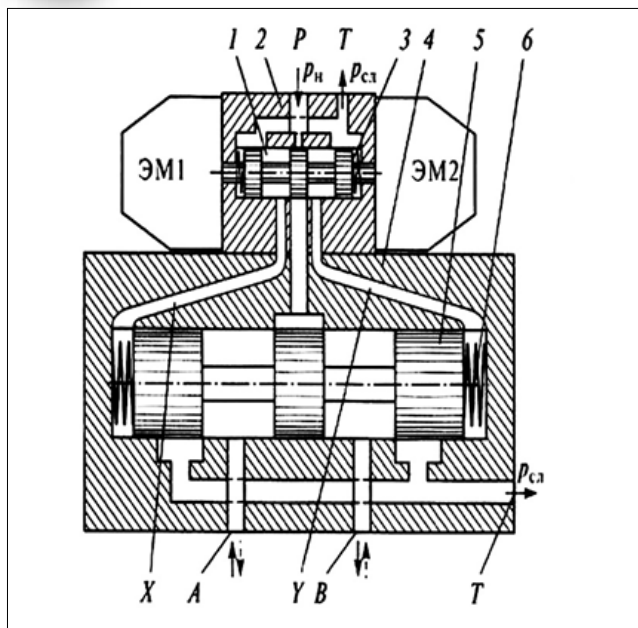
Two-stage hydraulic valve with electrohydraulic control: 1, 5 – slide valves; 2 – the casing of the first-stage distributor; 3, 6 – centering springs; 4 – distributor case of the second stage; R, T, A, B – connecting holes; X, Y – outlet openings of the first-stage distributor; ЭМ-1, ЭМ-2 – electromagnets
